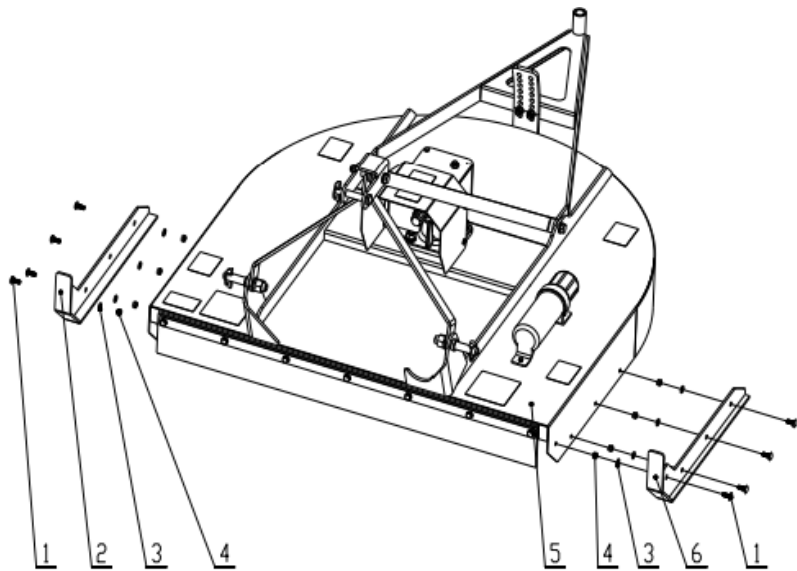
Installing R&L Skid Weldment and Fittings
